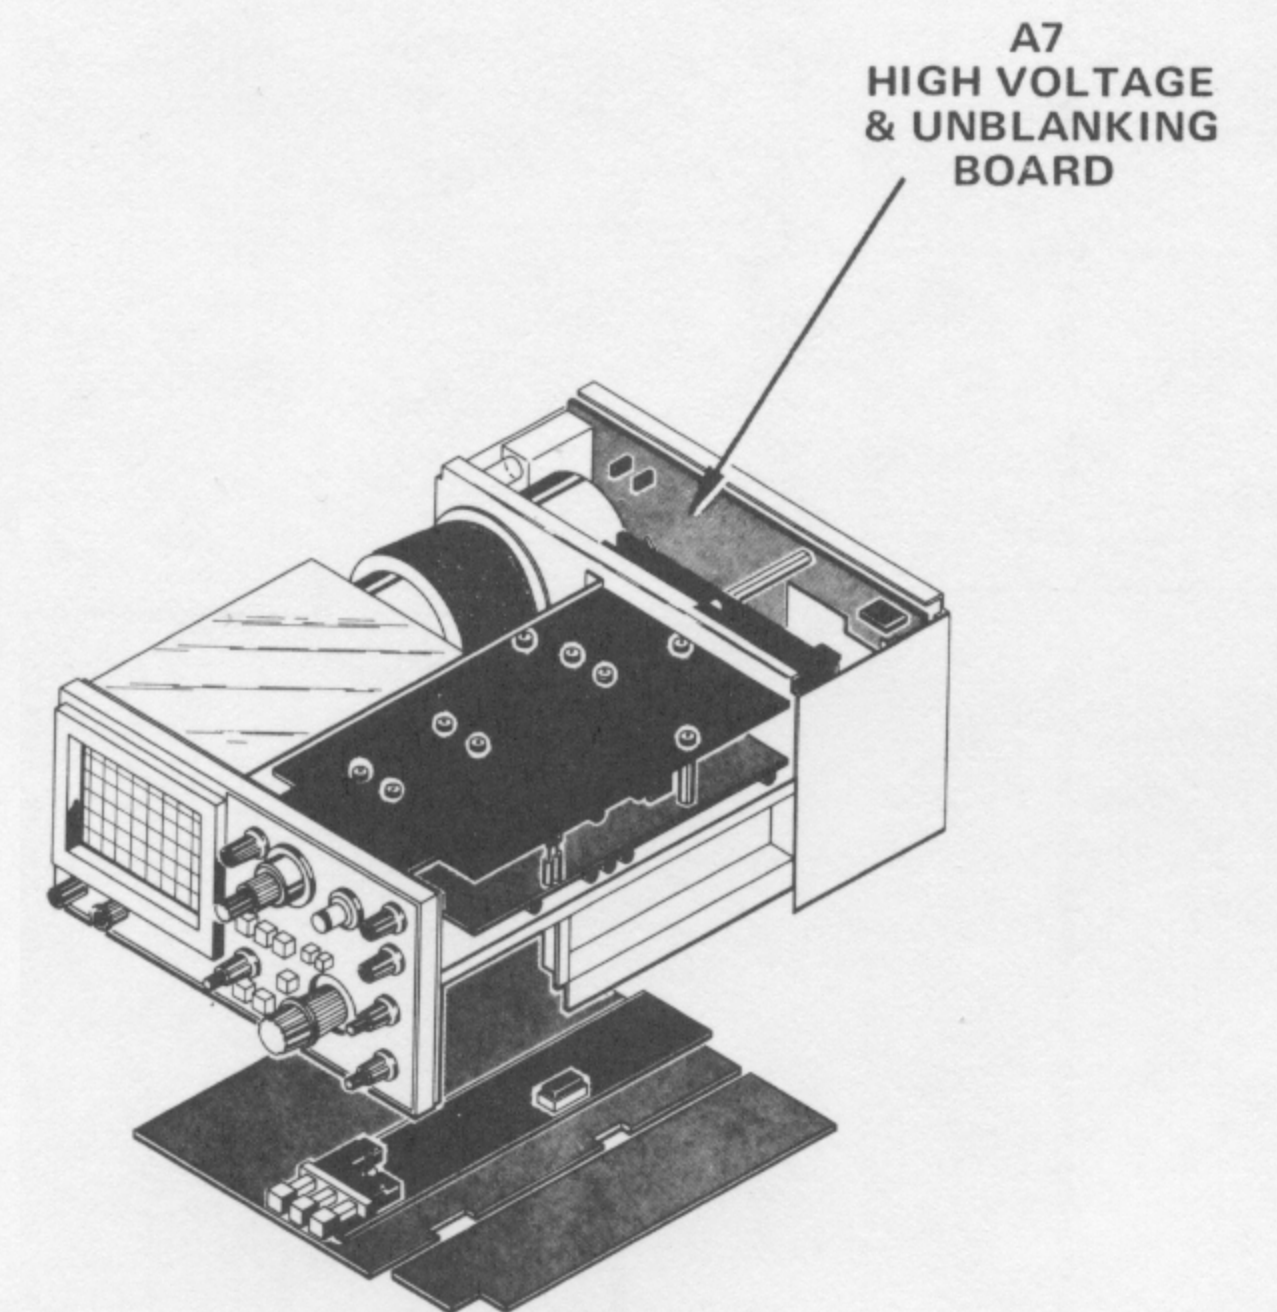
A7 High-Voltage and Unblanking board component locations, below SN 300121.
